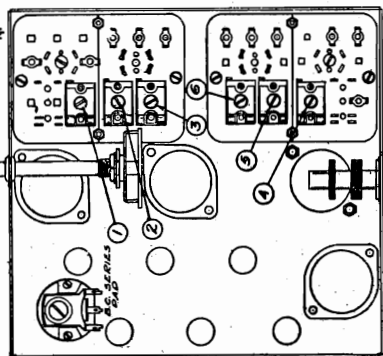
BOTTOM VIEW SHOWING TRIMMERS
